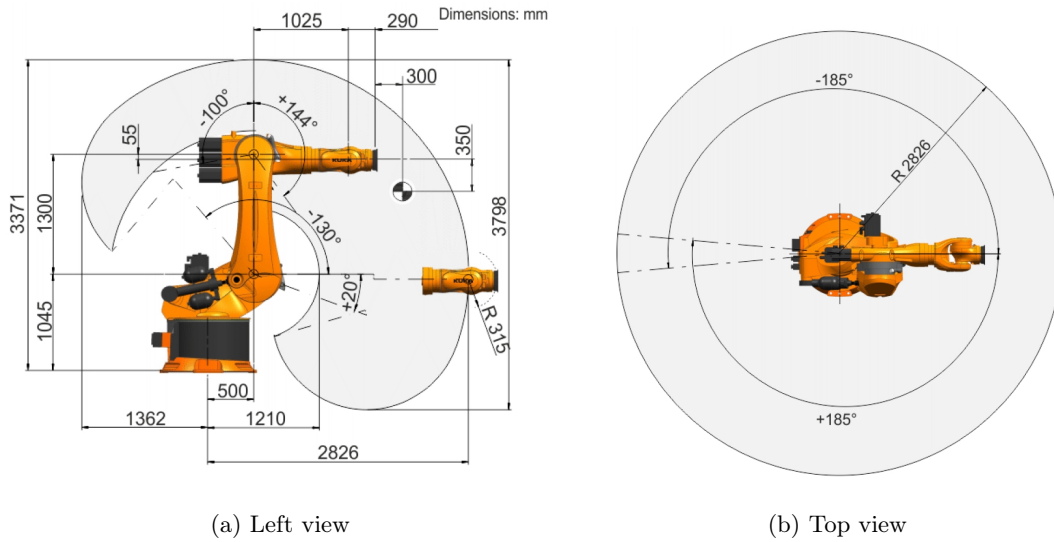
KUKA KR 500 dimensions (drawing) [4]
